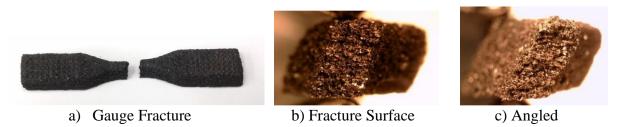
Fracture surfaces of dogbone subscale tensile specimens
